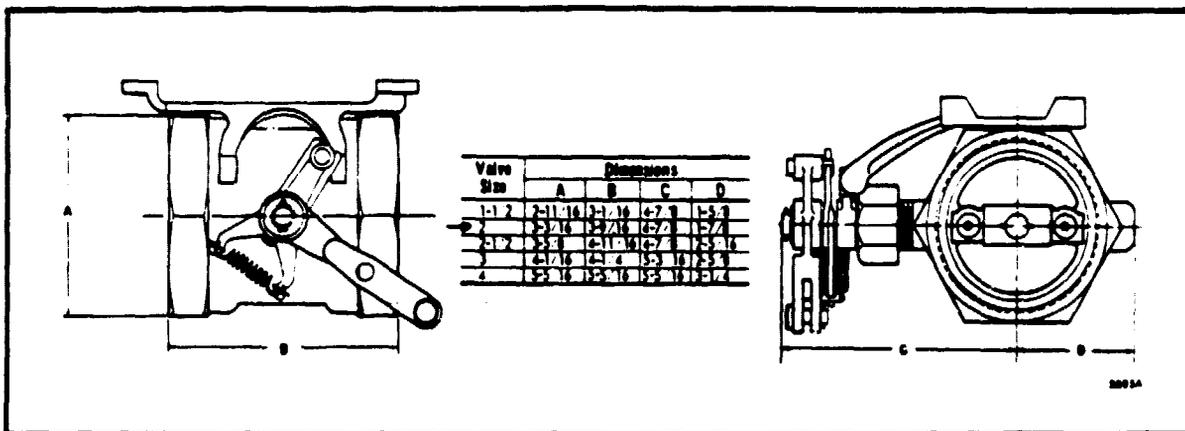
APPROXIMATE DIMENSIONS (IN INCHES) OF V51E ASSEMBLY.
